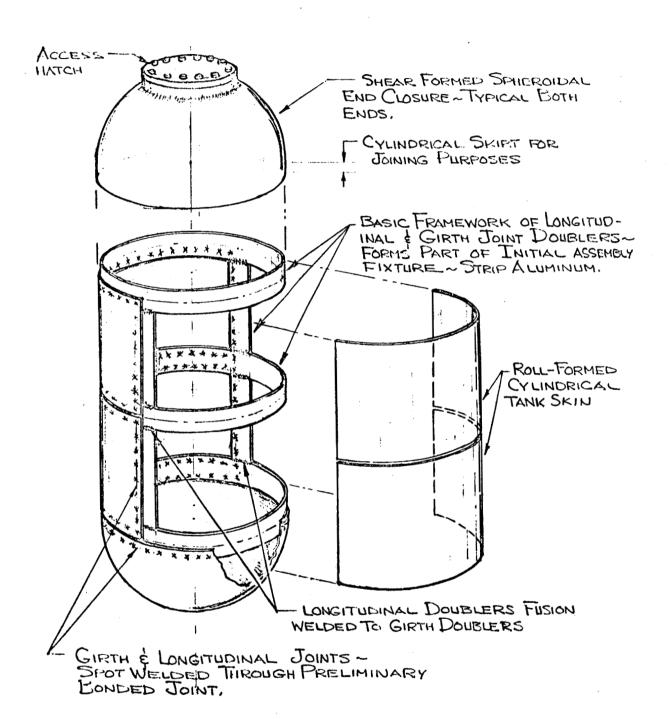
Application of Glue-Bond/Resistance-Weld Joining Technique to Subscale Tank Specimen
